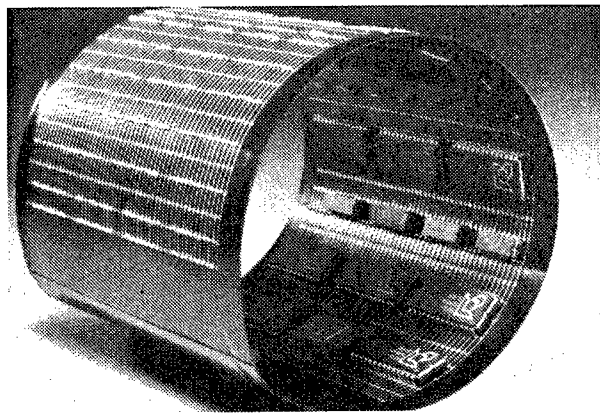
CYLINDRICAL CIRCUIT BOARD WITH MULTI-LEAD COMPONENTS
